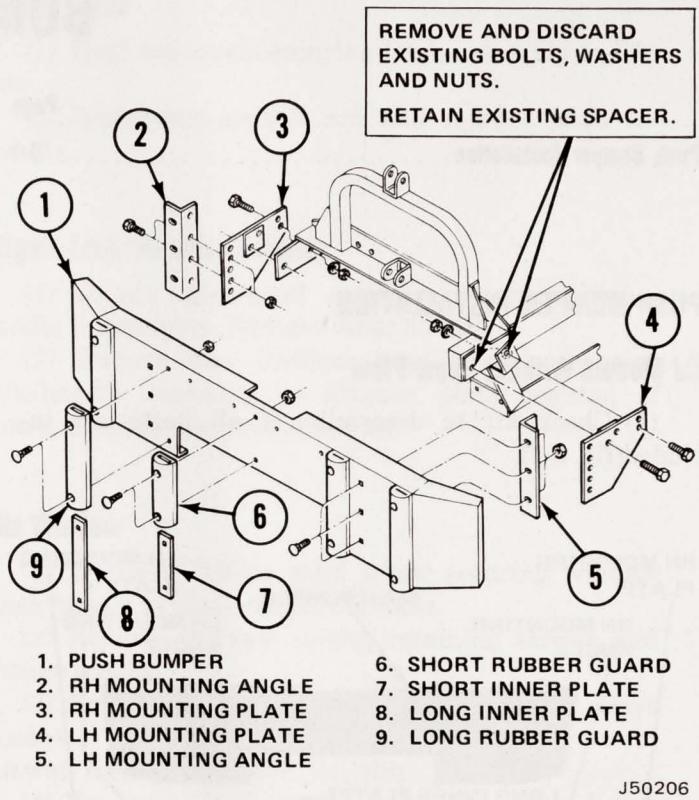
Push Bumper Mounting—CJ Models with Plow
